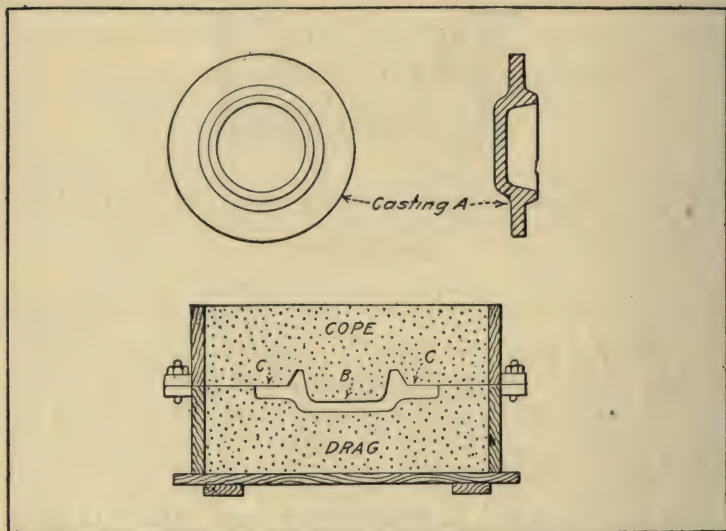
CIRCULAR COVER PATTERN SHOWING PART OF THE MOLD IN THE COPE SIDE
